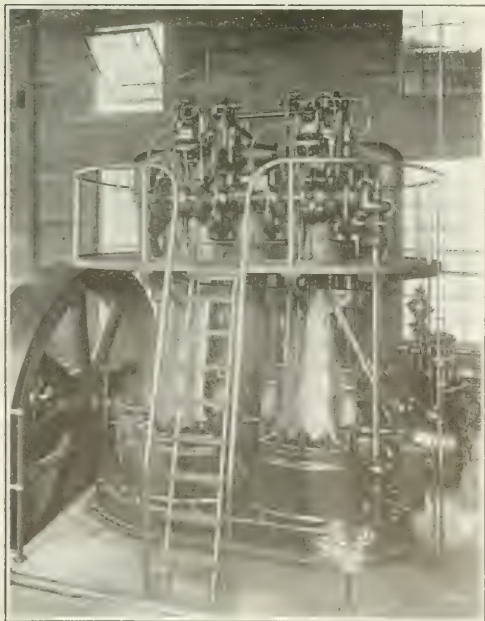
300-Brake-hp Atlas Crude-Oil Engine.
